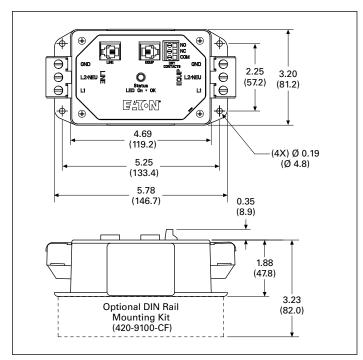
AGCFxxx30xxx Dimensions in Inches (mm)
